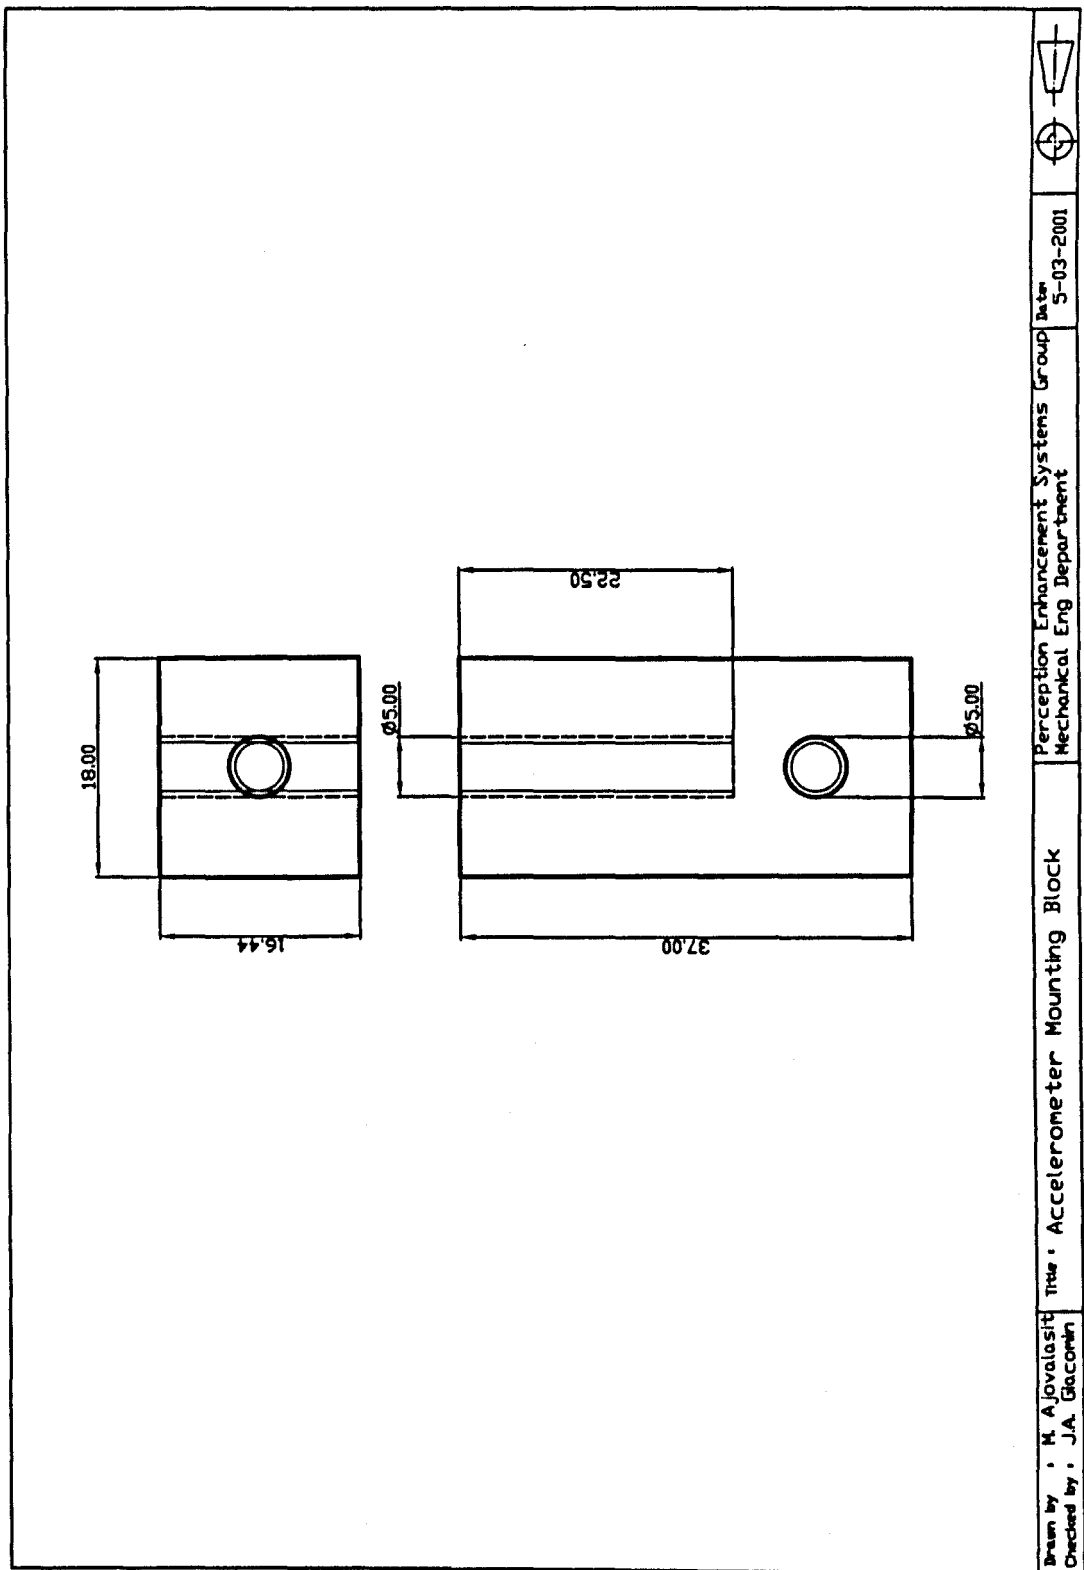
Geometrical dimensional of the engine mounting blocks used to record the engine idle vibration on the test automobiles.
